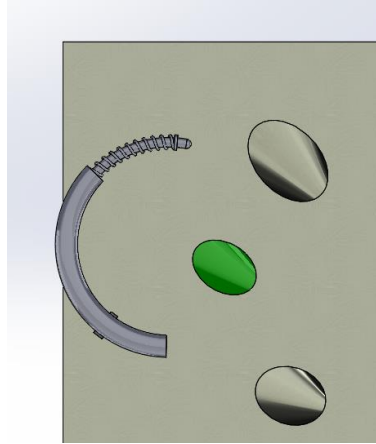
The bottom view of the collimator plate showing the air tube, the piston, and the spring.
